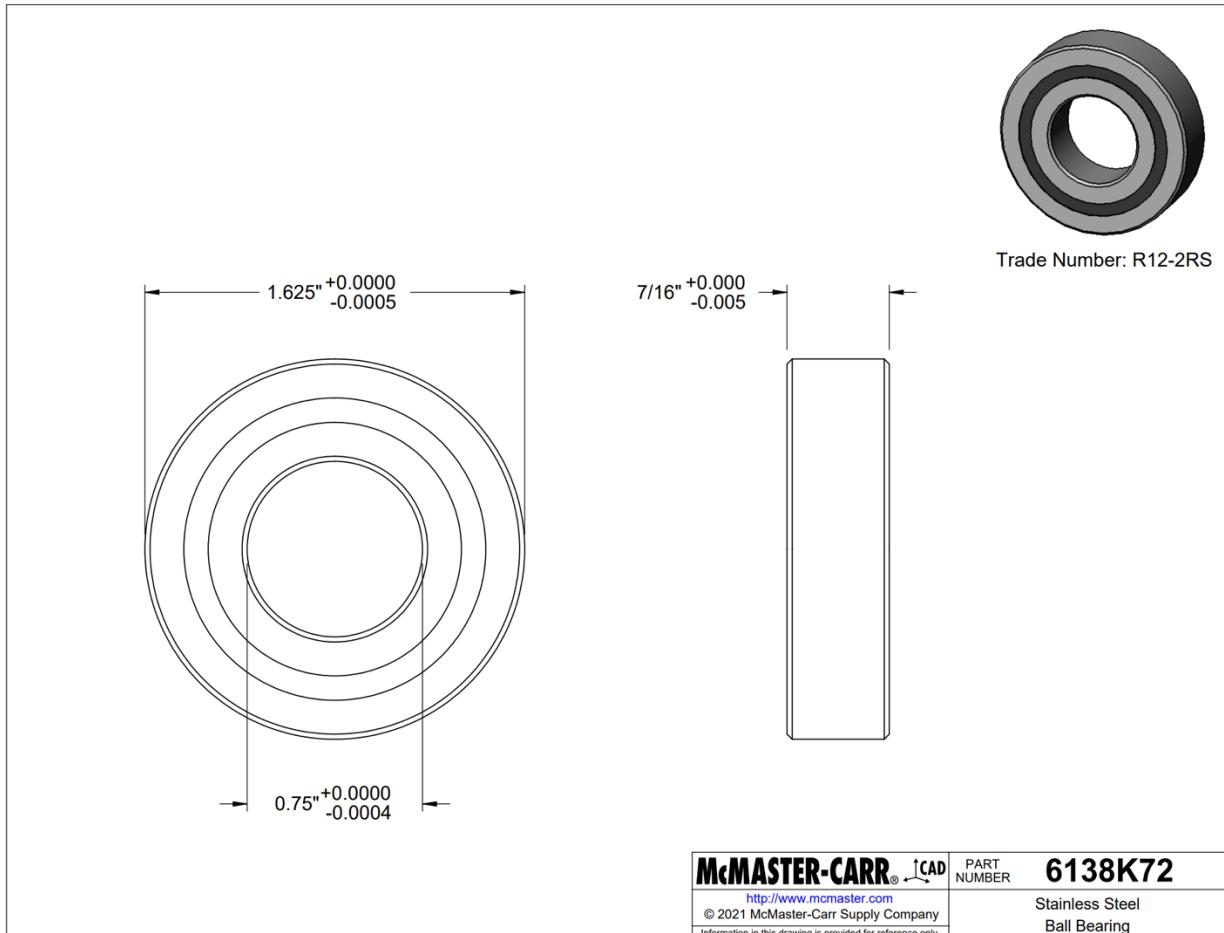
2D CAD drawing of the 6138K72 Ball Bearing
